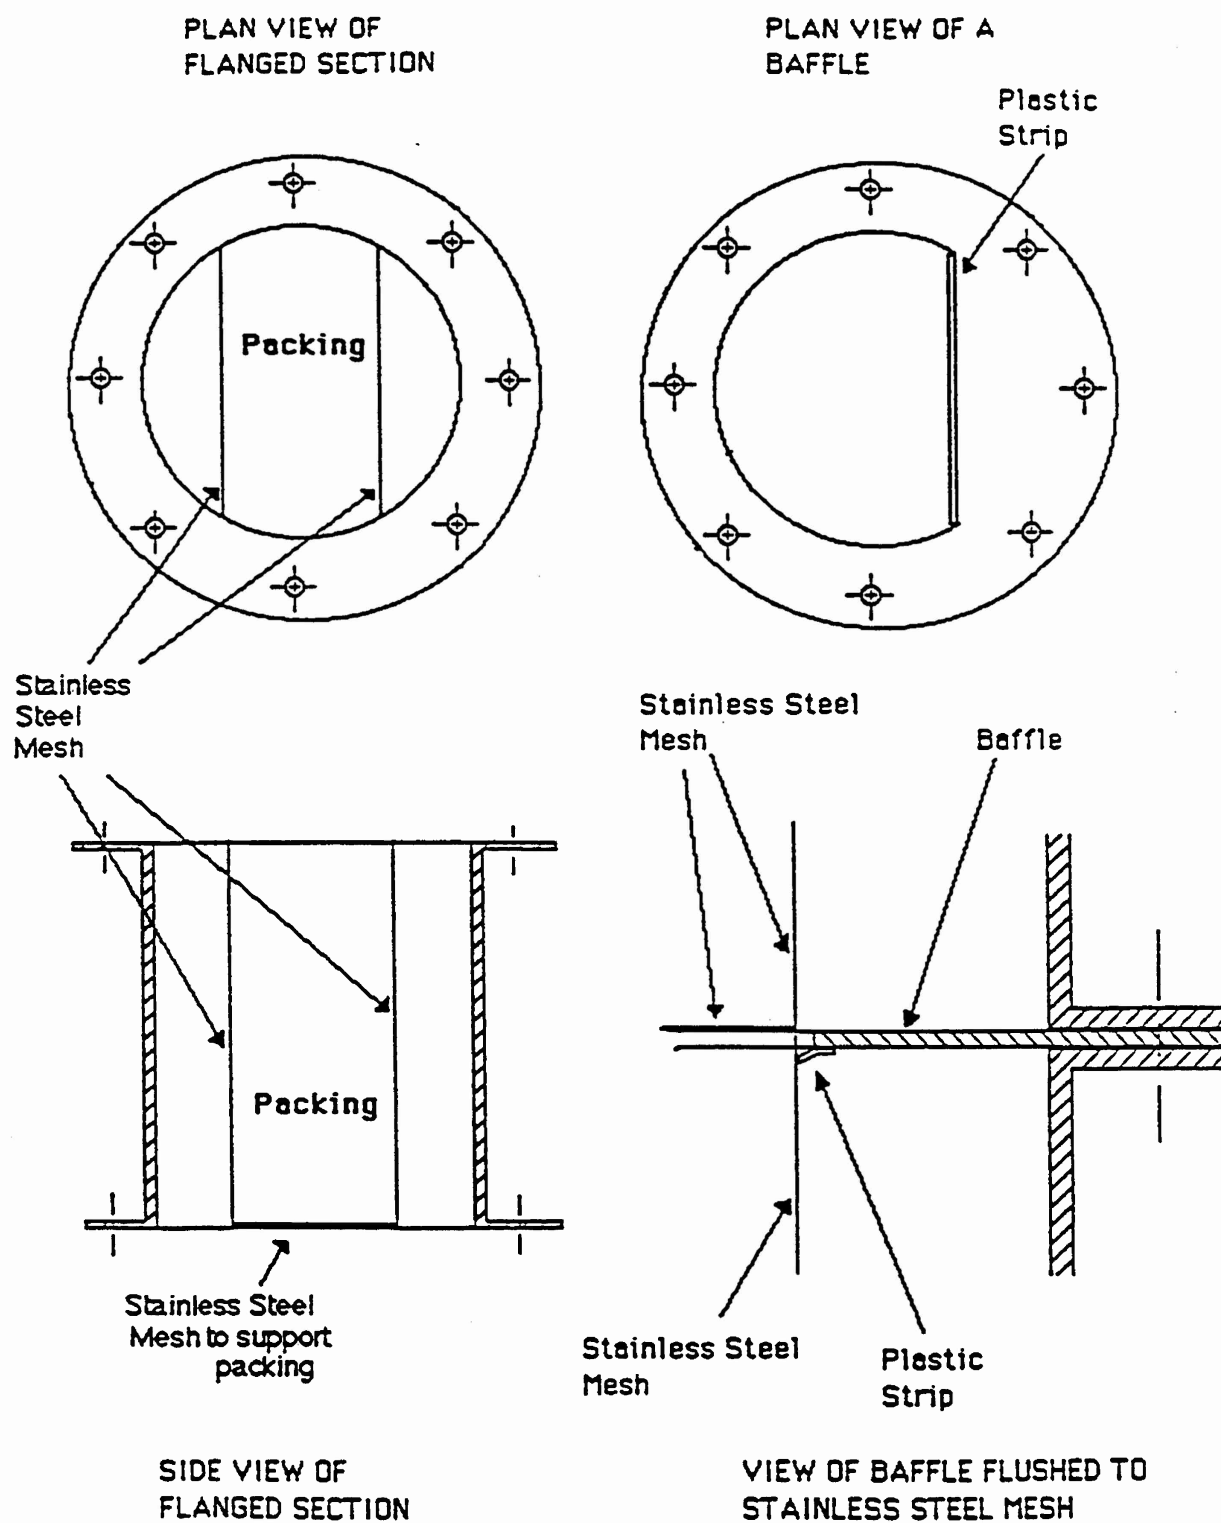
Crossflow Air-Stripping (CFAS) Tower Details.
